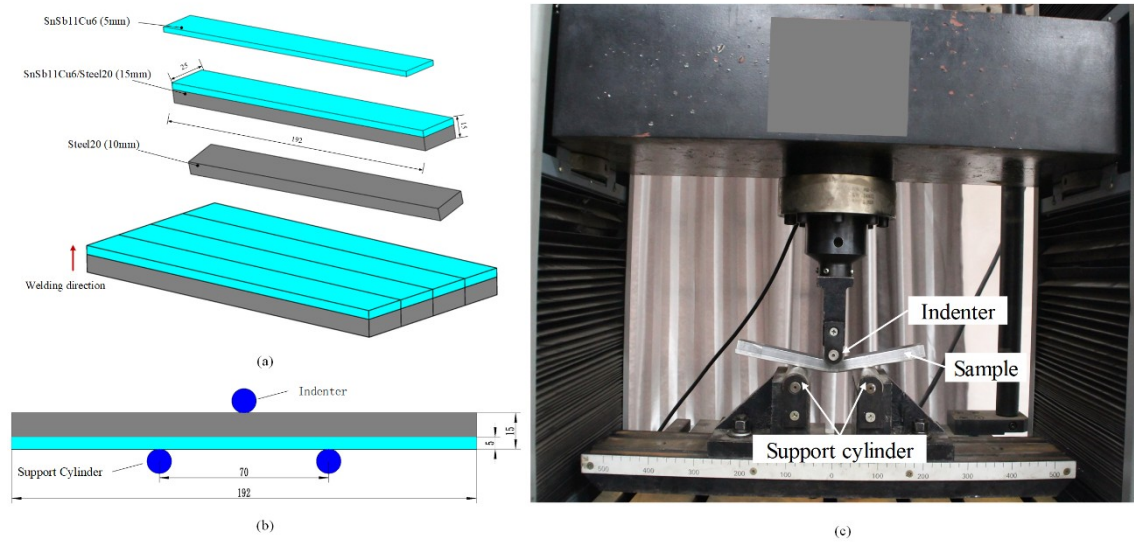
(a) Dimensions of tensile specimen , (b)Schematic diagram of 3PB, and (c) Electronic universal testing machine
